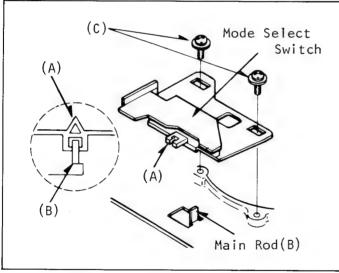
Adjustment of Cam Gear and Mode Select Switch - (12)
